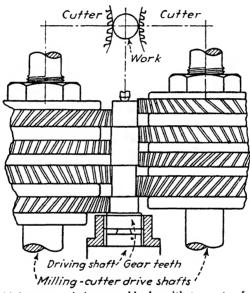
Machining transmission-gear blanks with two sets of milling cutters.
